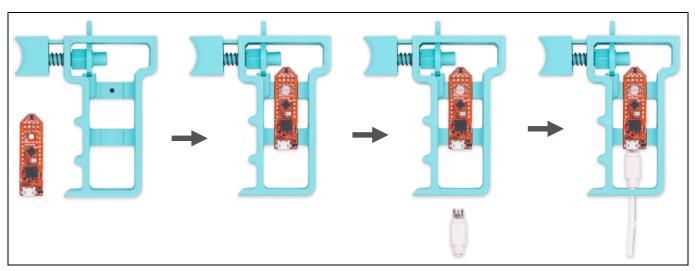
XENSIV<sup>™</sup> DrillTriggerV2 - assembly
